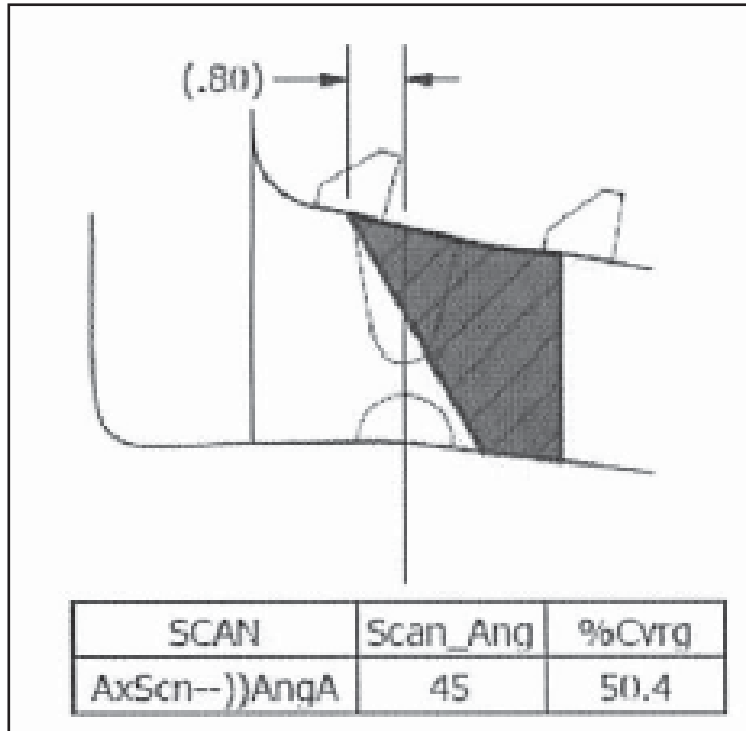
Weld RCW-15, 45° Nozzle Side Axial Scans
